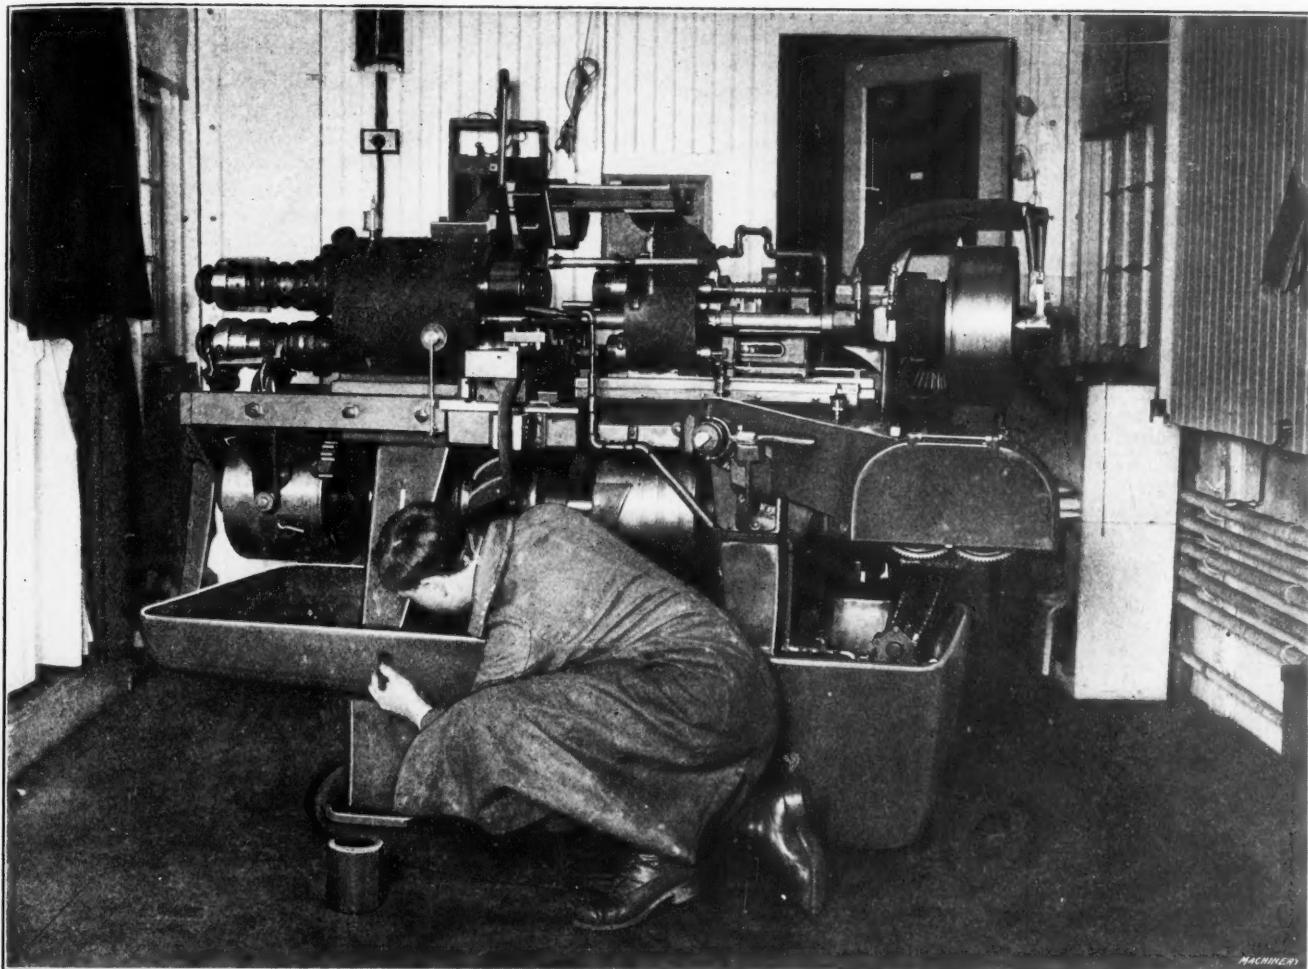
Painting a Machine with a Flat Oil Paint before photographing
